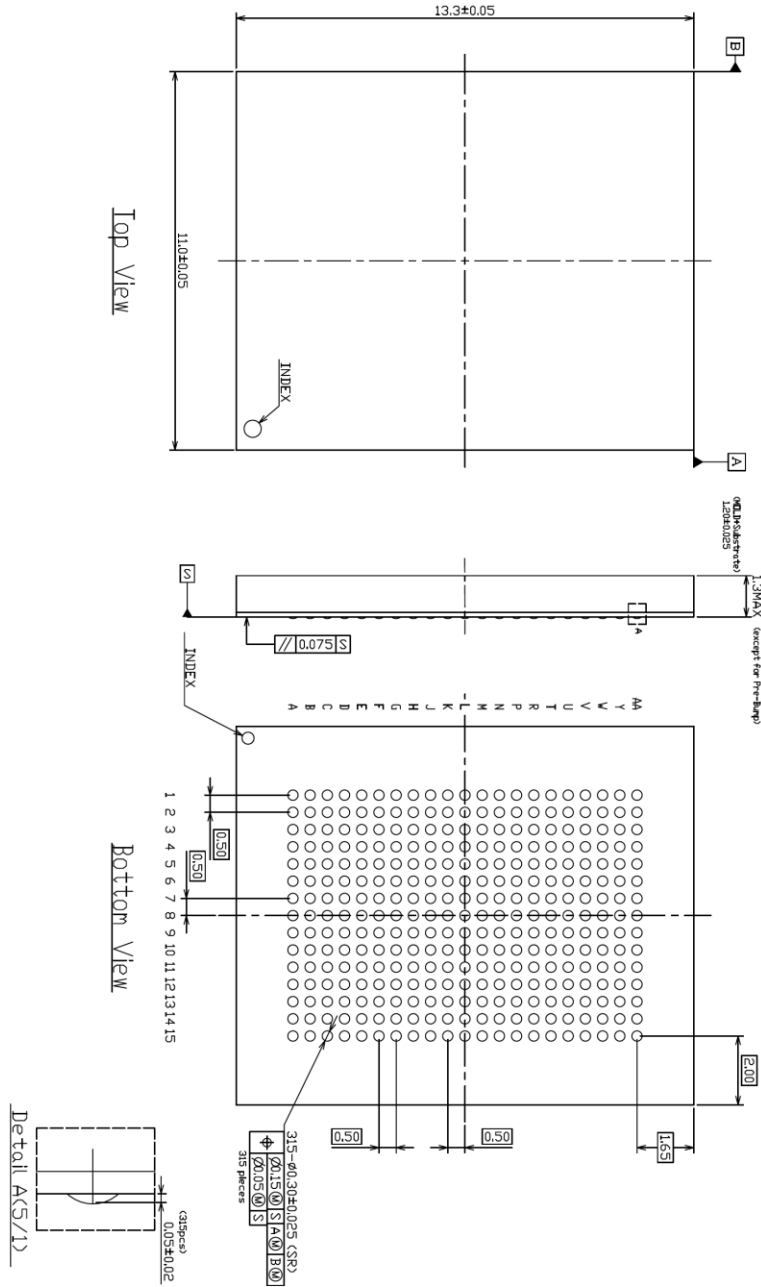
Package Dimension of P-FLGA315-1114-0.50-001
